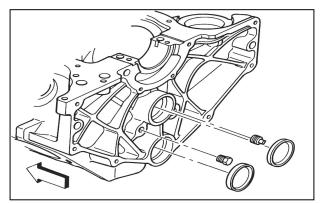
Rear Cylinder Block Oil Gallery Plugs
